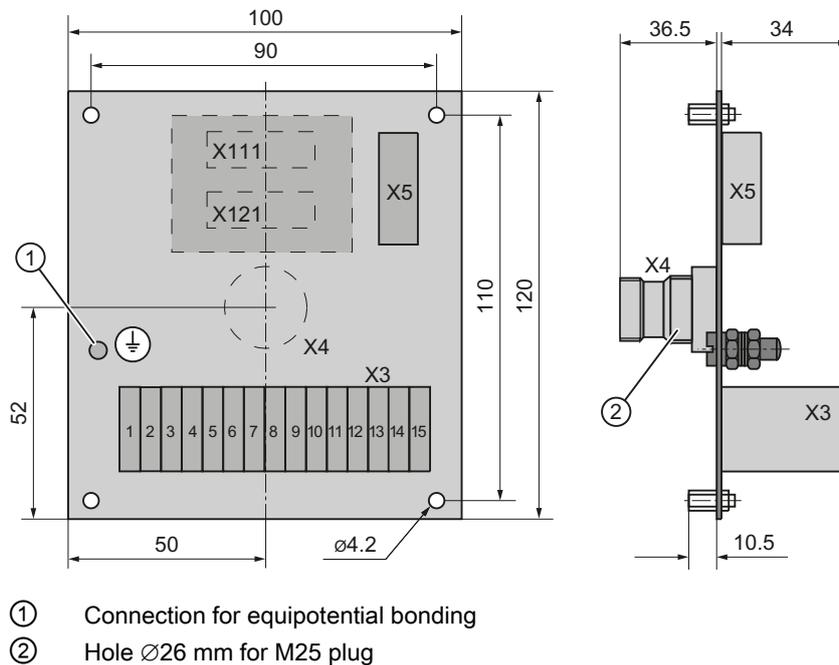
Distributor for MPI bus in the front and side view with 4-wire enabling
